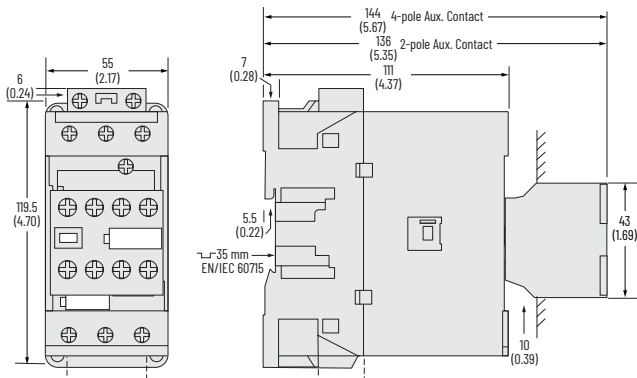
100-E40...100-E65 3-Pole Contactors with Side-mounted Auxiliary Contact
